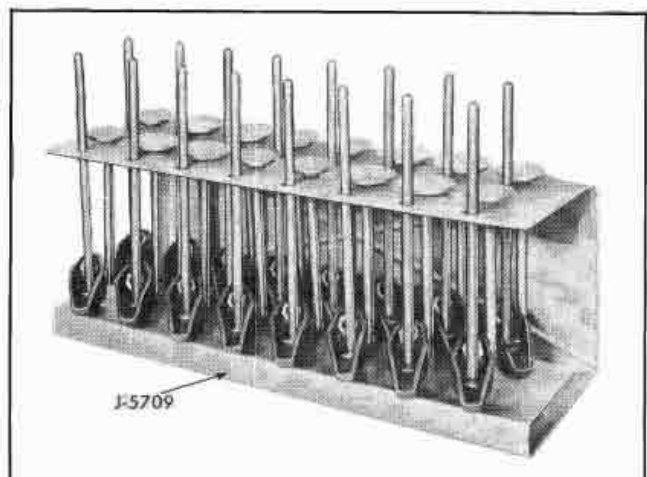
Valve and Valve Train Holding Stand J-5709
